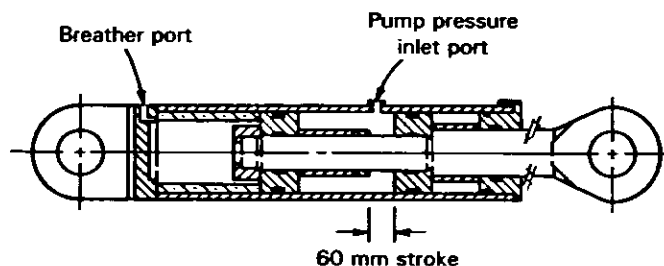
Aligning cylinder designed to control horizontal loading on the VAMT support.
